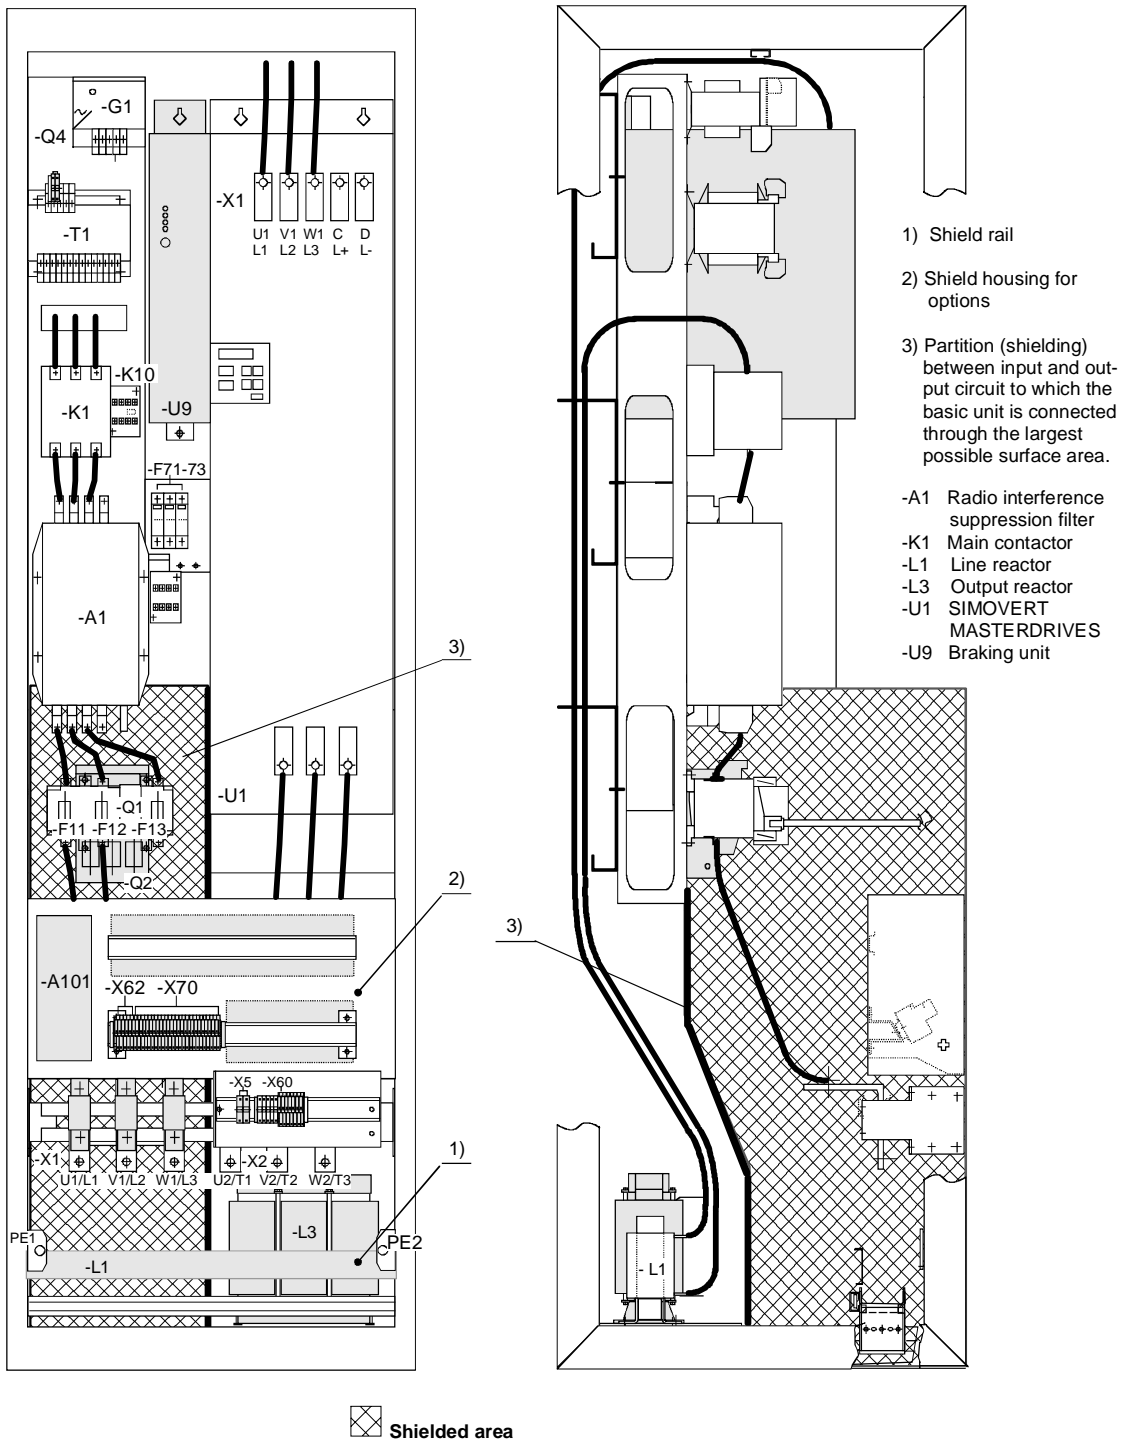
Example of a chassis unit mounted in the cabinet with radio interference suppression filter and line reactor
